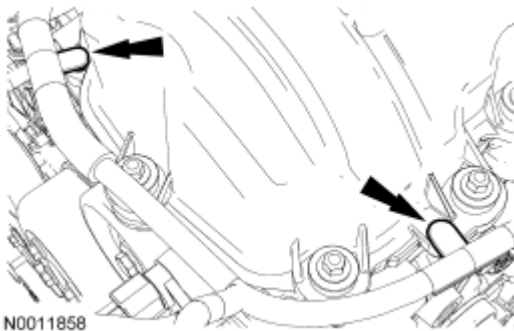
Locating Engine Wiring Harness Pin-Type Retainers
